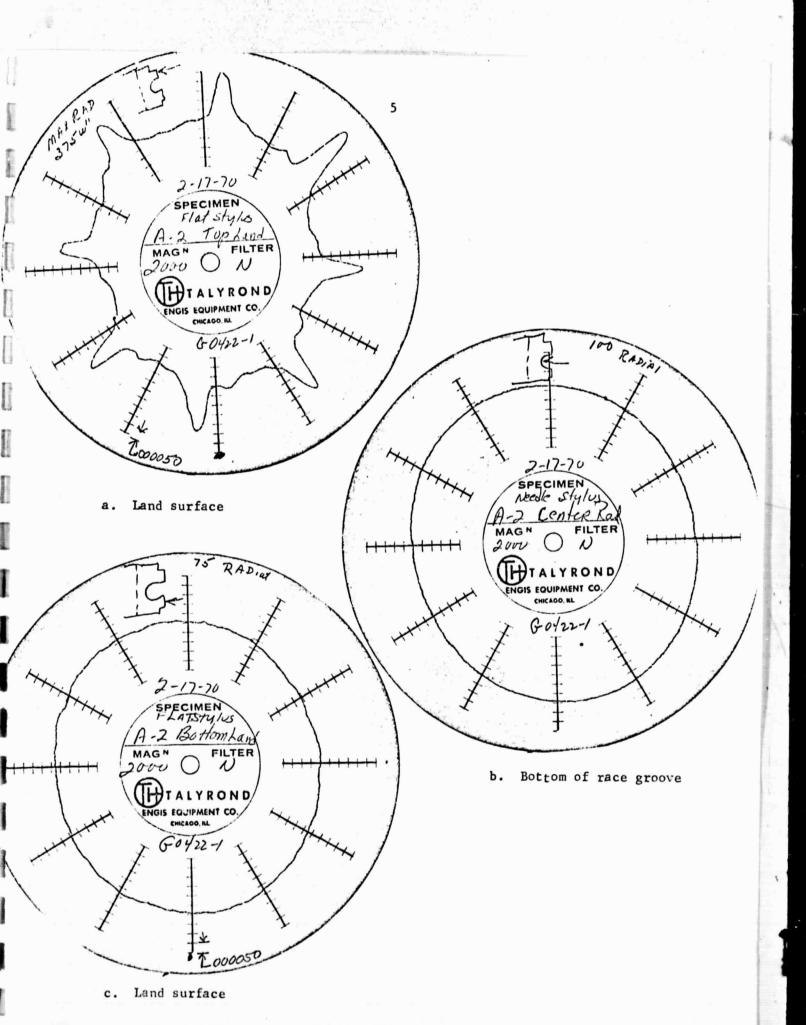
TALYROND TRACES OF SEVERELY BRINELLED FAN BEARING INNER RACE
